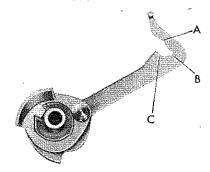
Latch with Main Drive Bushing and Disc Assembled with Stud
